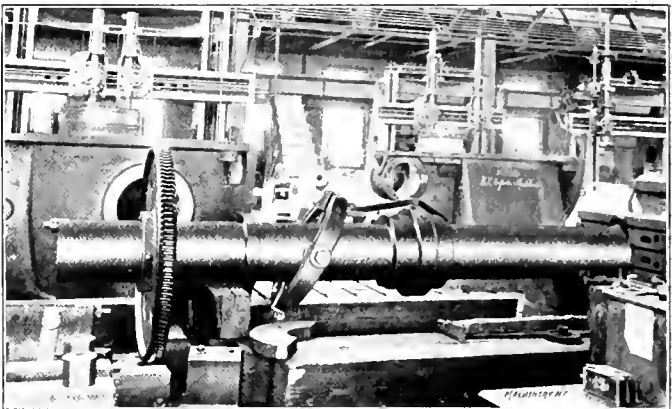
Boring Bar for Spherical Boring, showing Driving Gear.
